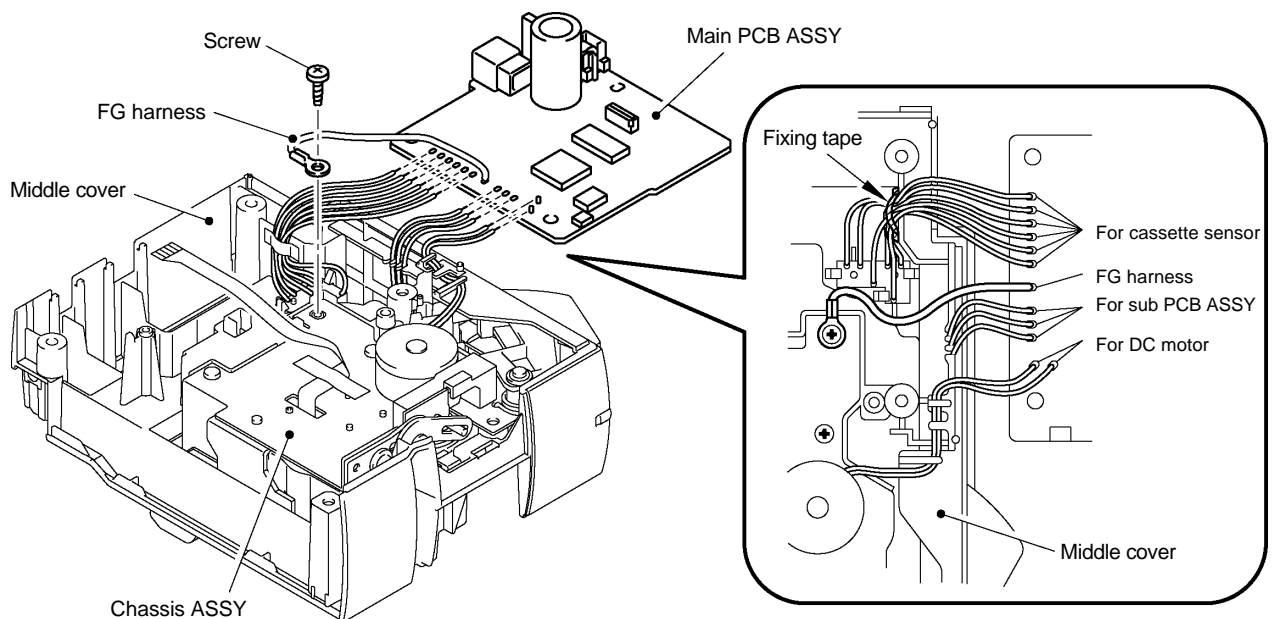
Removing the Main PCB ASSY (2)
